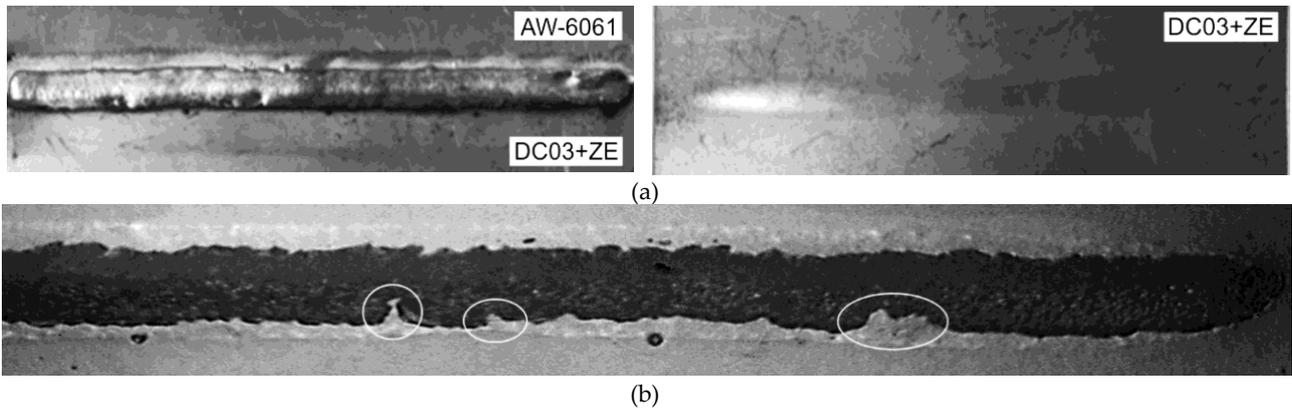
Braze welded joint steel DC03 + aluminum AW-6061, brazing consumable AlSi12: a) both sides of the joint; b) C-scan of the joint
